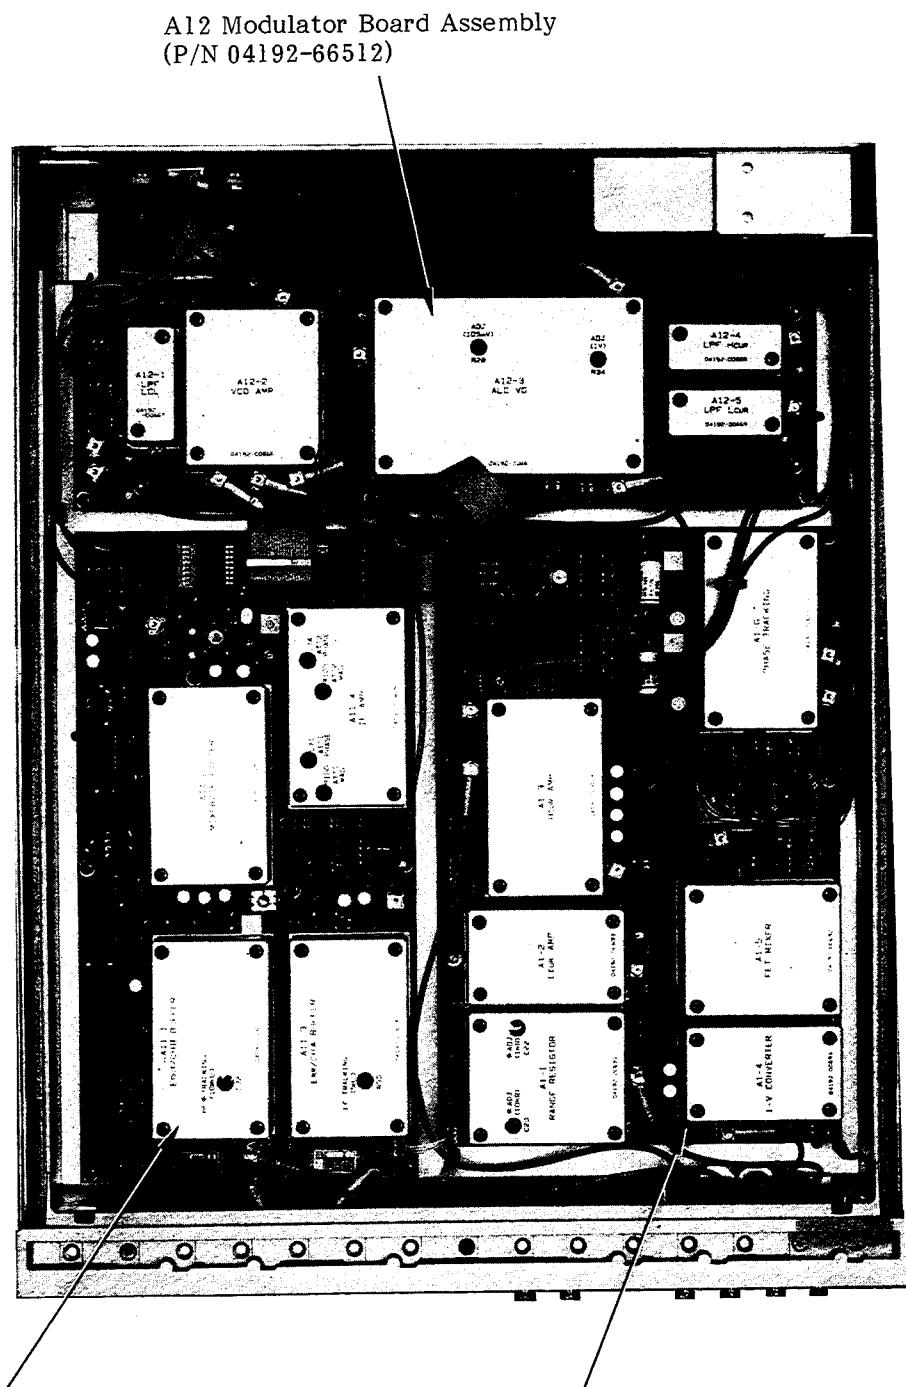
Assembly Locations (Sheet 3 of 4).
